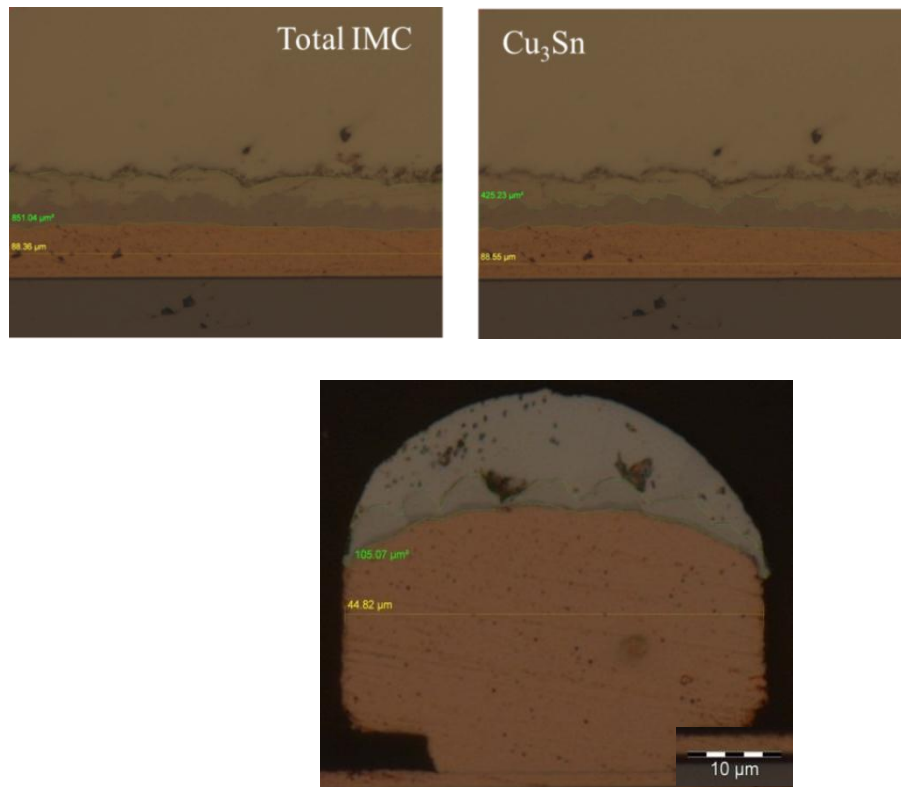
(a-b) shows the typical IMC assessment technique for BGA solder joints (c) IMC measurements for microbump solder joints.
